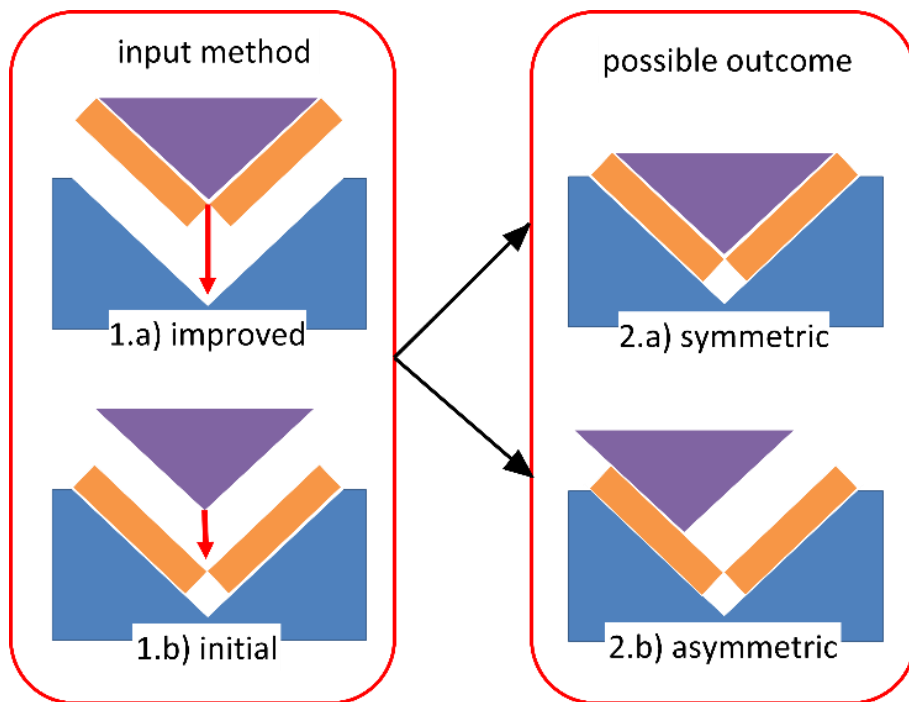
1.a) Improved insertion method – magnets adhered on the wedge prior to the insertion; 1.b) Initial insertion method – magnets adhered on the rotor prior to the insertion; 2.a) the anticipated outcome with a symmetric position; 2.b) the asymmetric position experienced in the initial method
